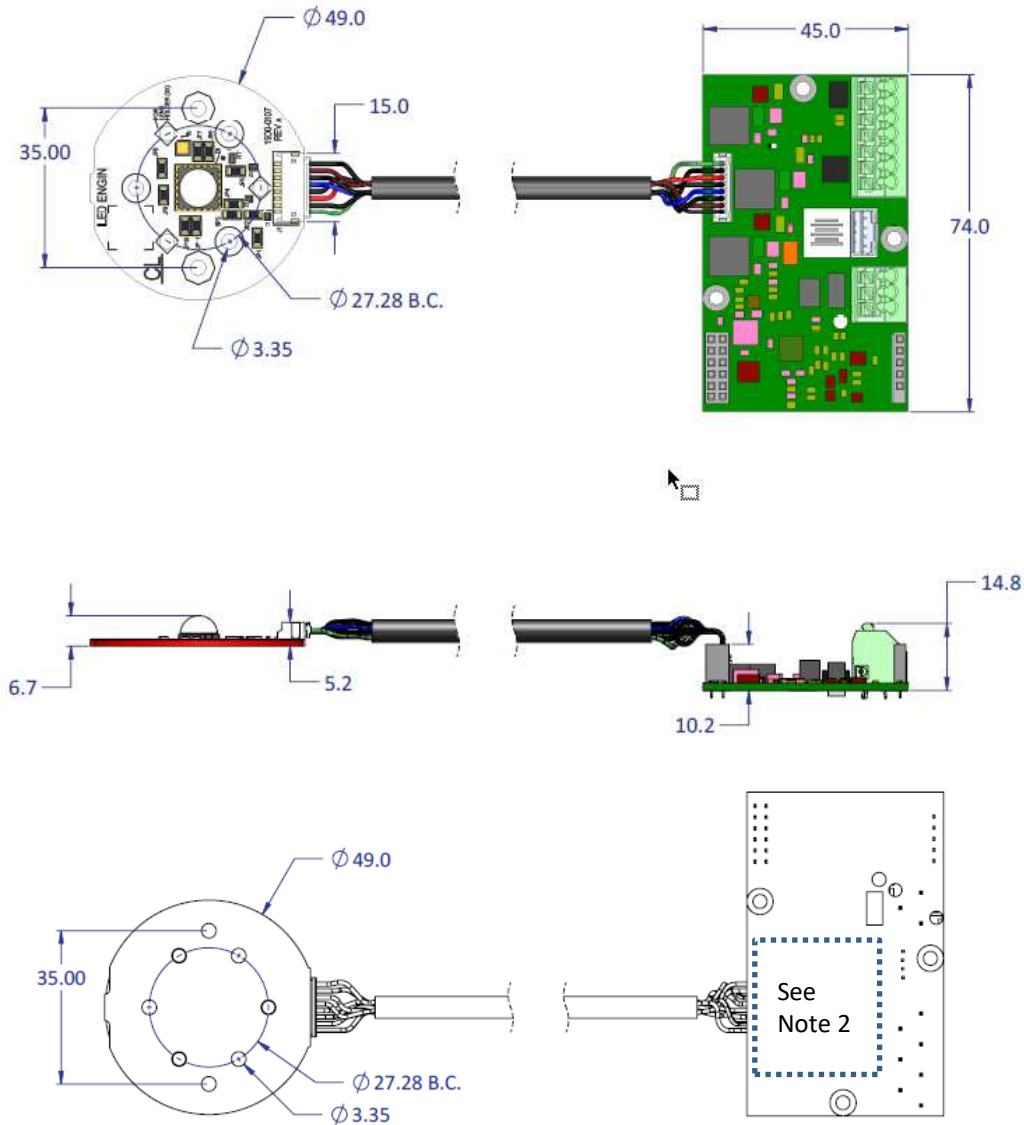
Mechanical dimensions of LuxiTune light engine – without secondary lens
